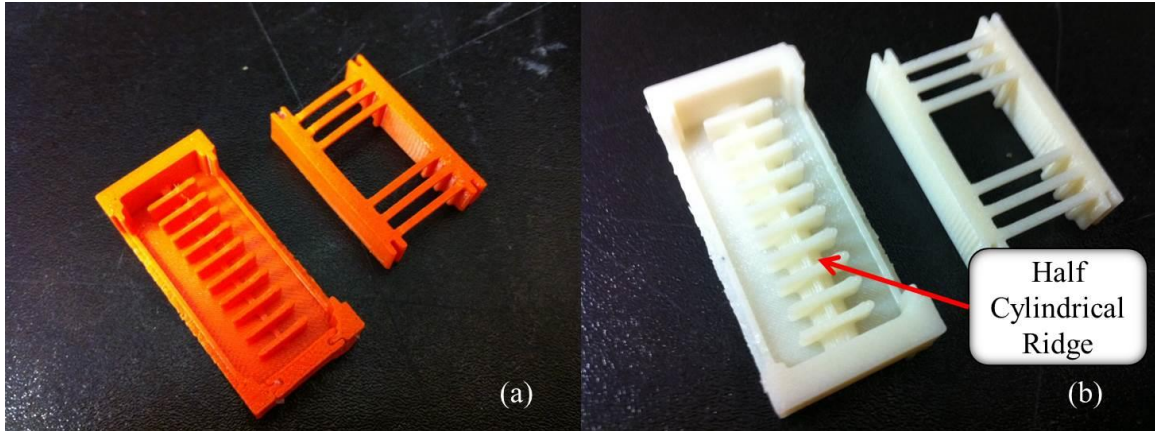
Molds for Extension Mechanisms, (a) Mold V3b; (b) Mold for Final Extension Mechanism
